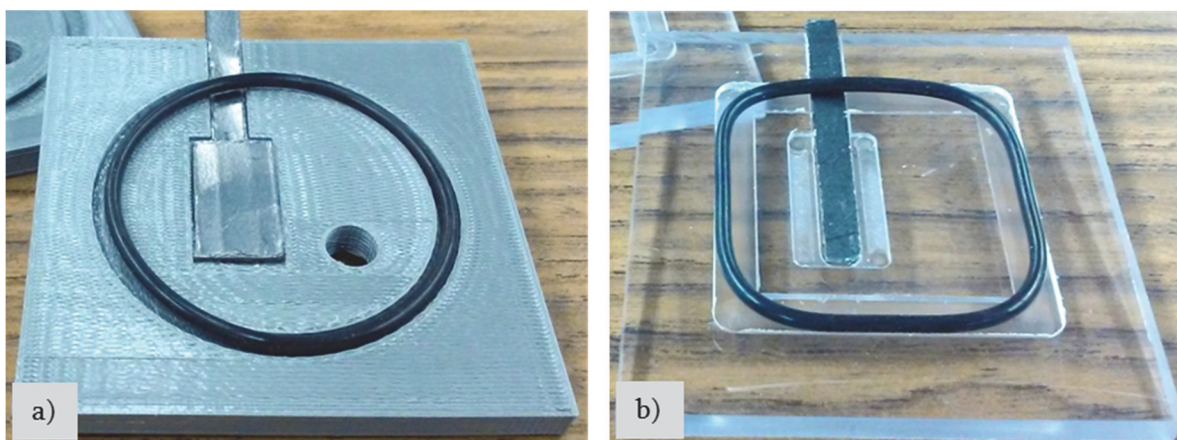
a) 3D printed prototype of flow cell housing with graphite current collector and rubber O-ring. b) Flow cell housing machined in the University of Idaho machine shop.
